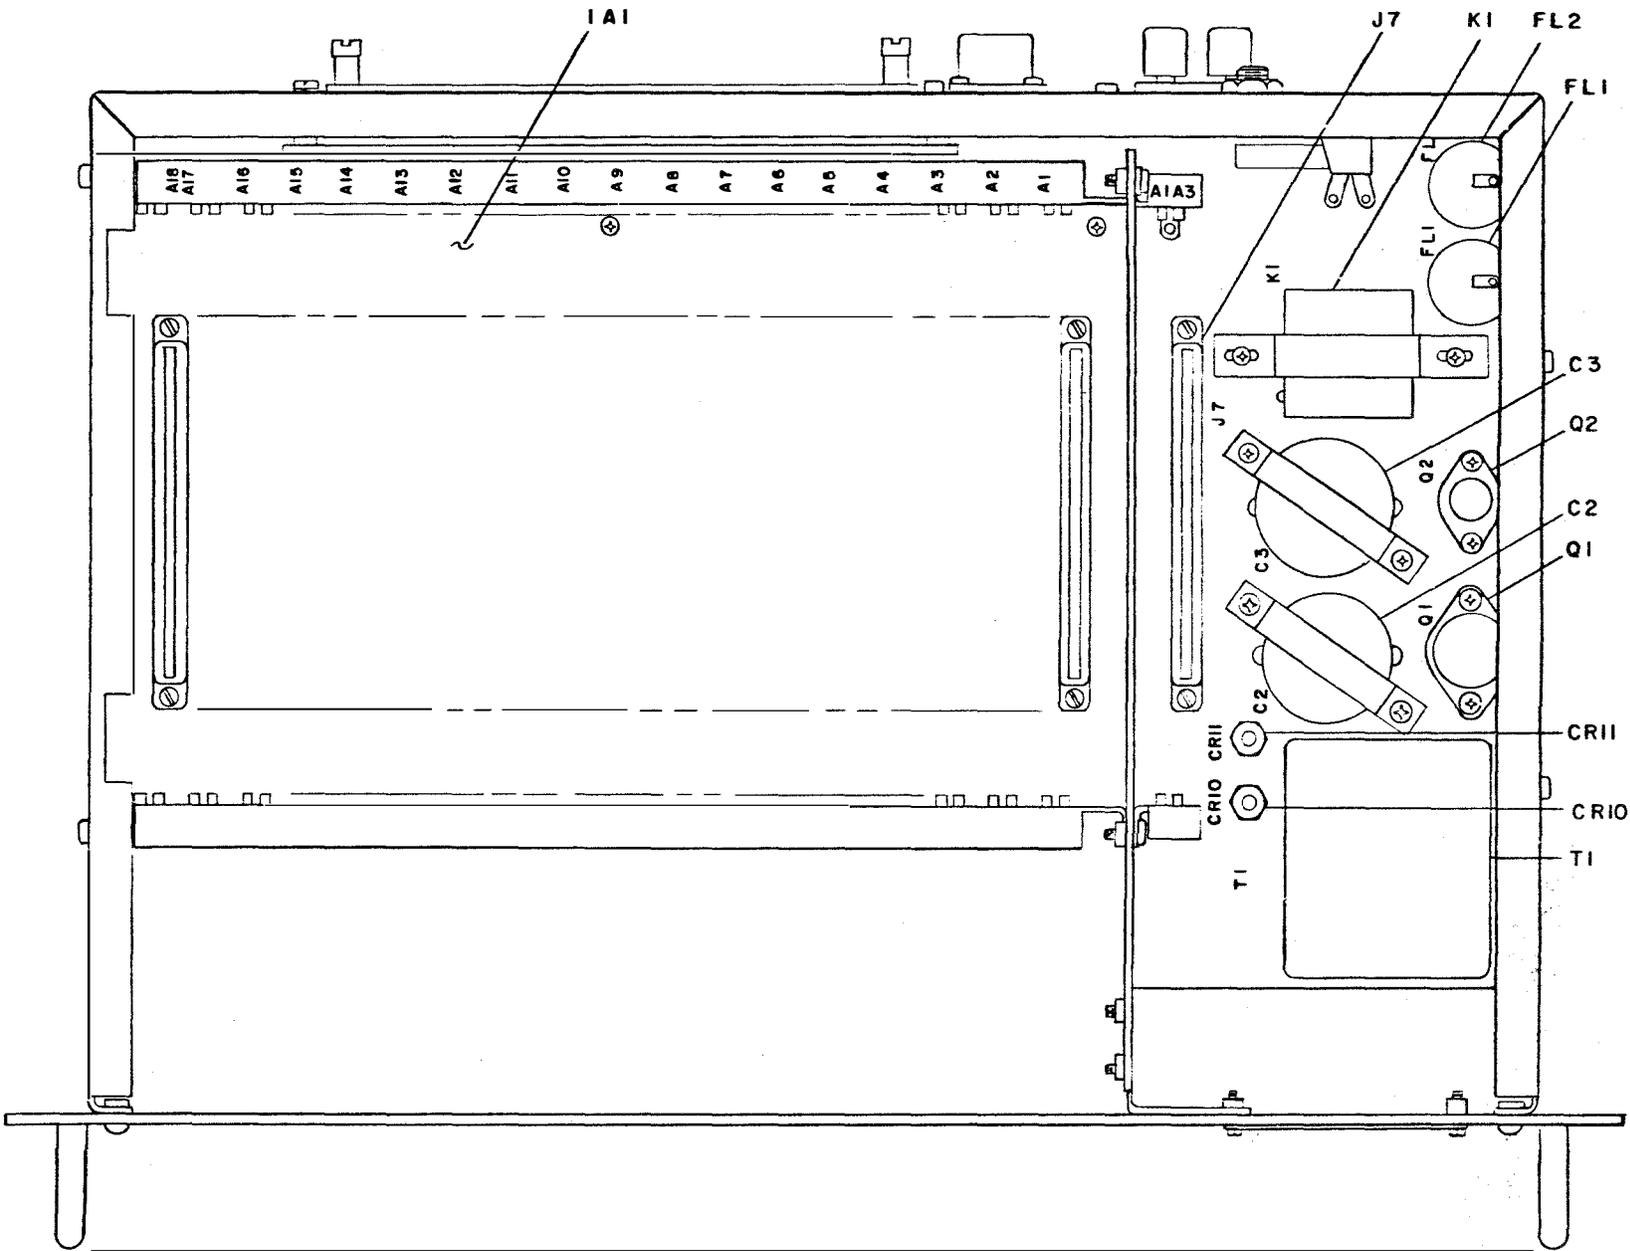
Chassis Mounted Components Location (Sheet 1 of 2)
